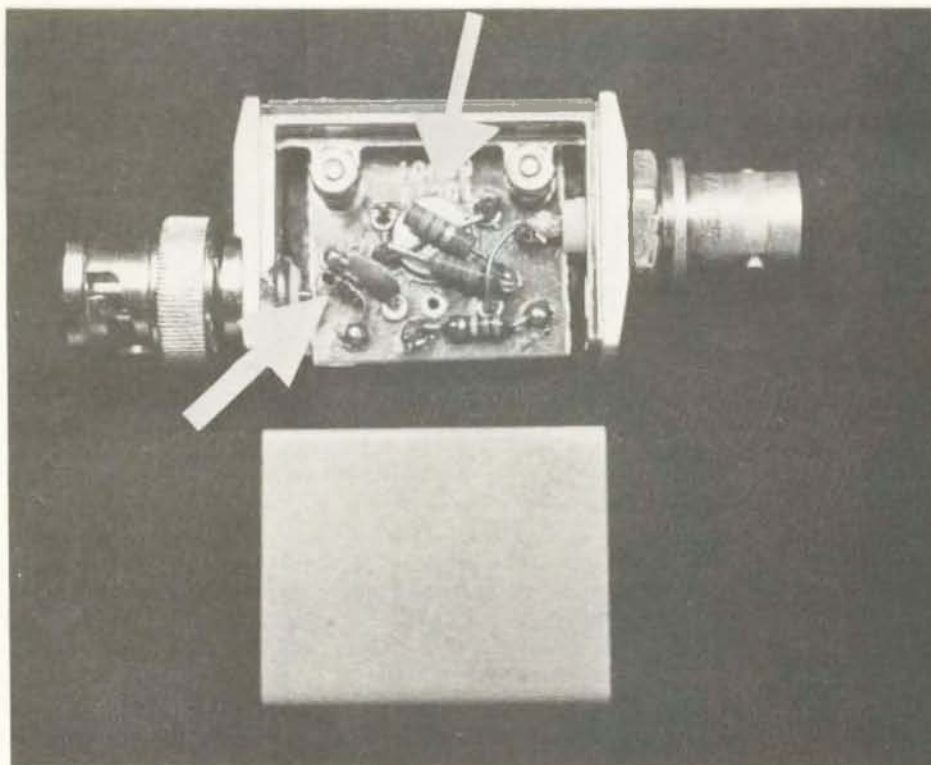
Photo E. Detector assembly. Arrows point to hot carrier diode and to the battery.
